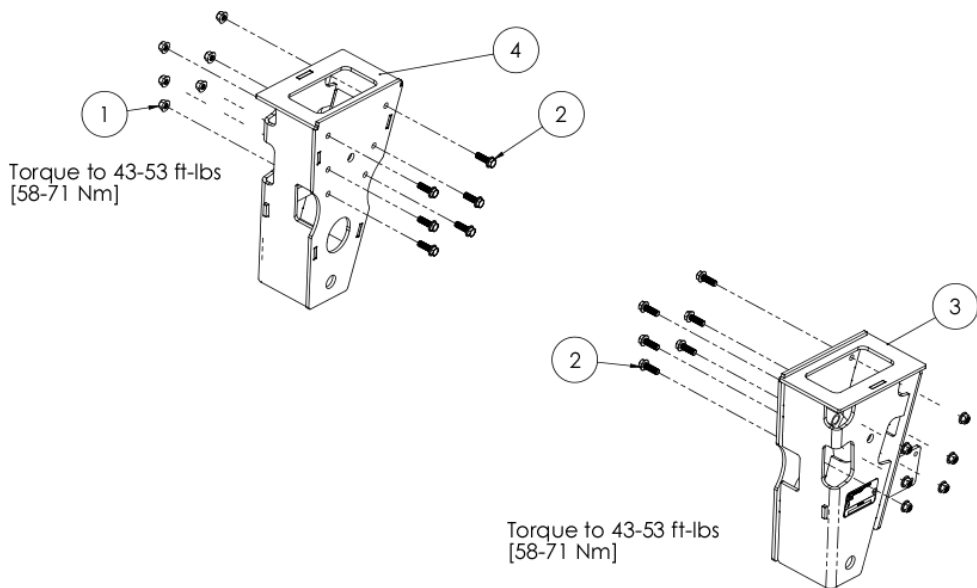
Track Rod Mount holes to be reamed out. Driver side only.
